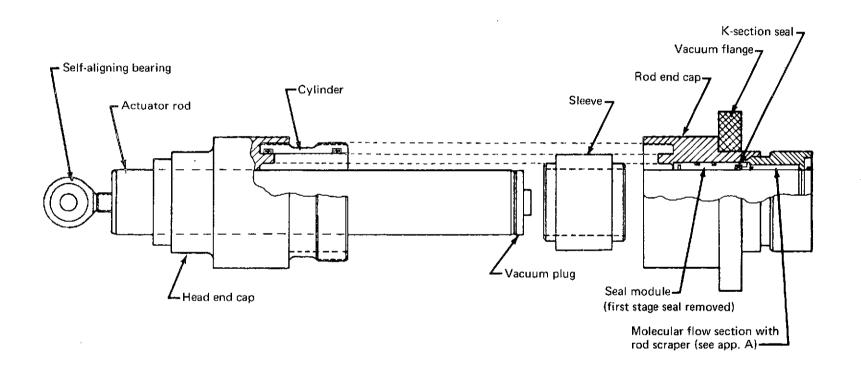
6.35-CM (2.5-IN.) VACUUM ENVIRONMENT TEST ACTUATOR
